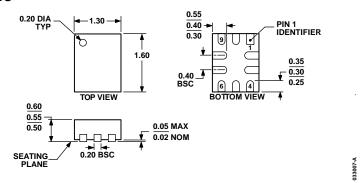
10-Lead Lead Frame Chip Scale Package [LFCSP\_UQ] 1.30 mm × 1.60 mm Body, Ultrathin Quad (CP-10-10) Dimensions shown in millimeters
